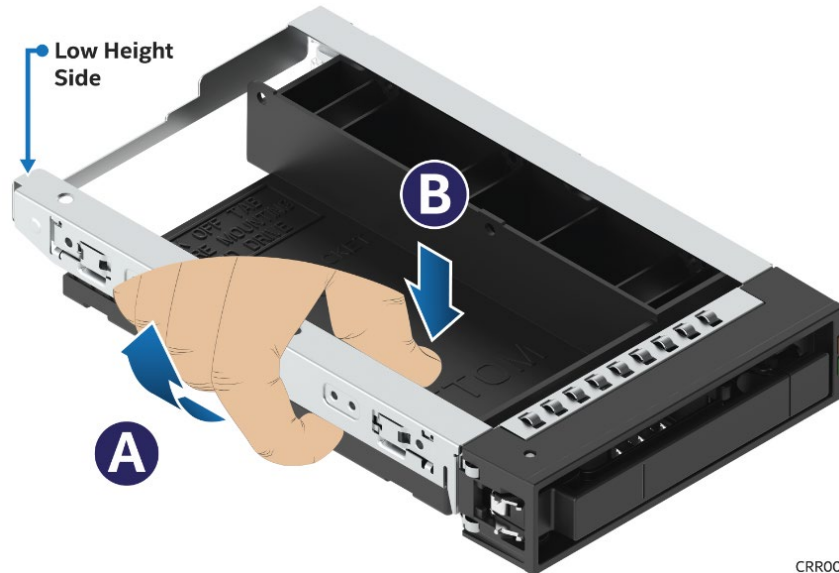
3.5" Drive Carrier Assembly - Drive Installation to Carrier
